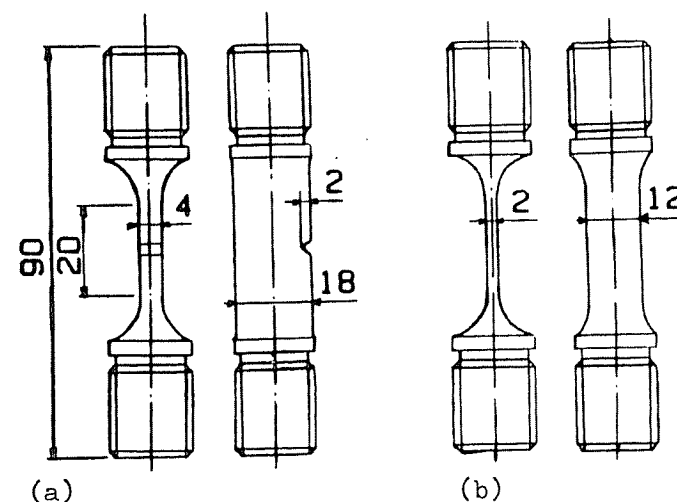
Single edged notched specimen geometry (in mm). (a) initially, (b) after machining to leave only a short crack
